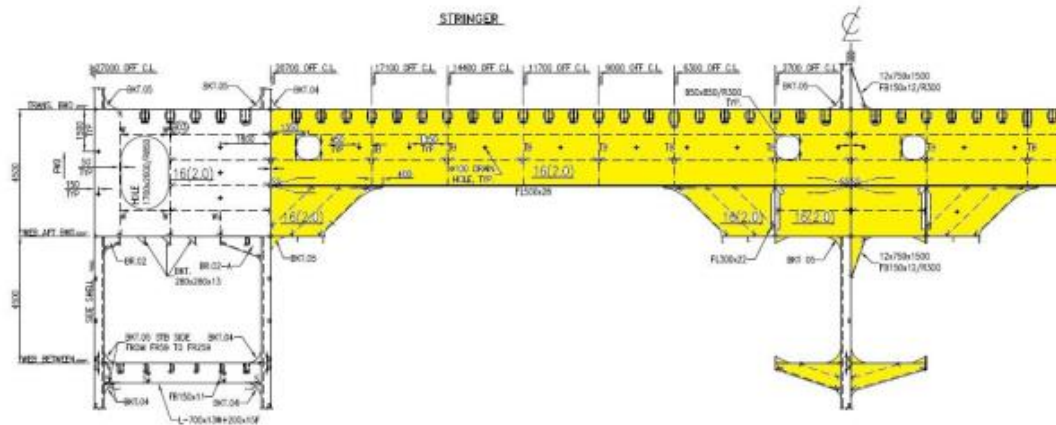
Transverse bulkheads (horizontal stringers & brackets) – Top view.
